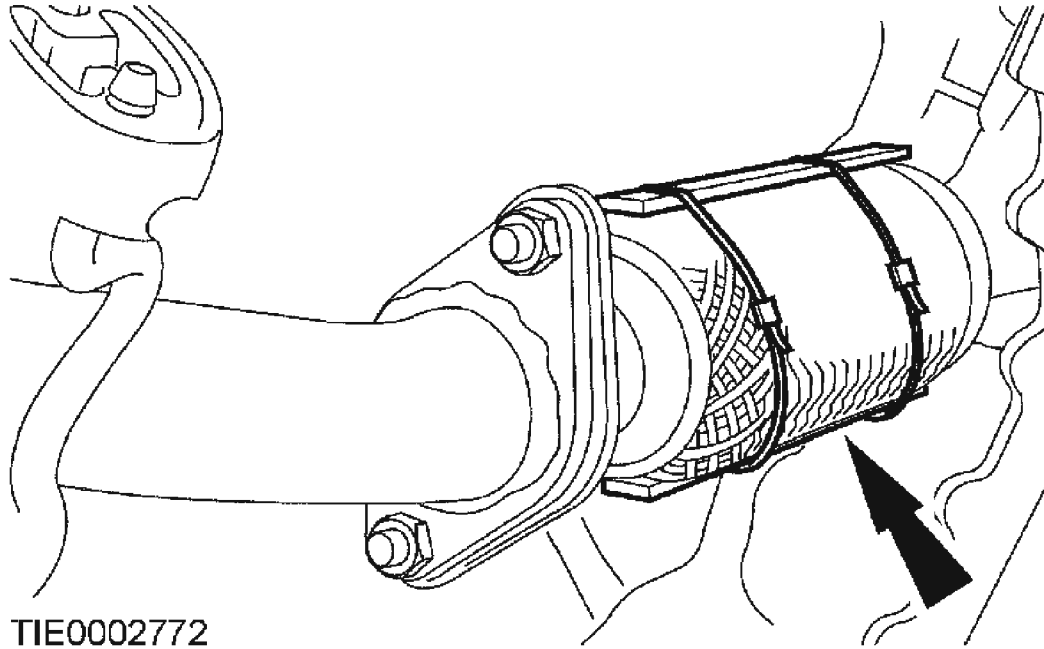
Supporting Exhaust Flexible Pipe With A Support Wrap Or Suitable Splint
